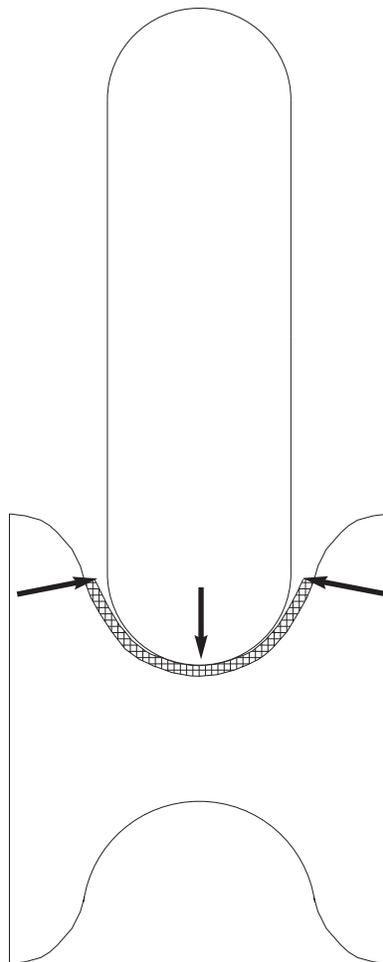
Forming material thinner than the design gauge results in a larger radius, as shown here. Material not contained by the rolls bends at the points indicated.
